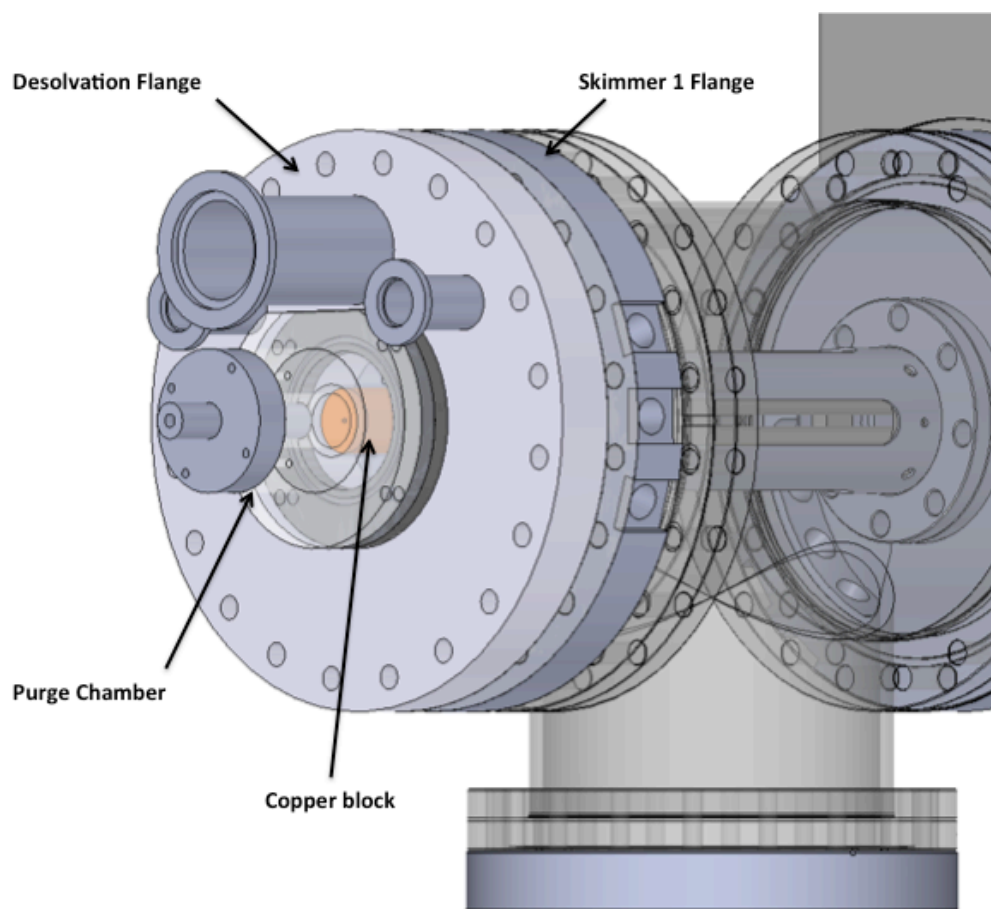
This schematic demonstrates how the purge chamber is connected to the external part of the copper block holder.
